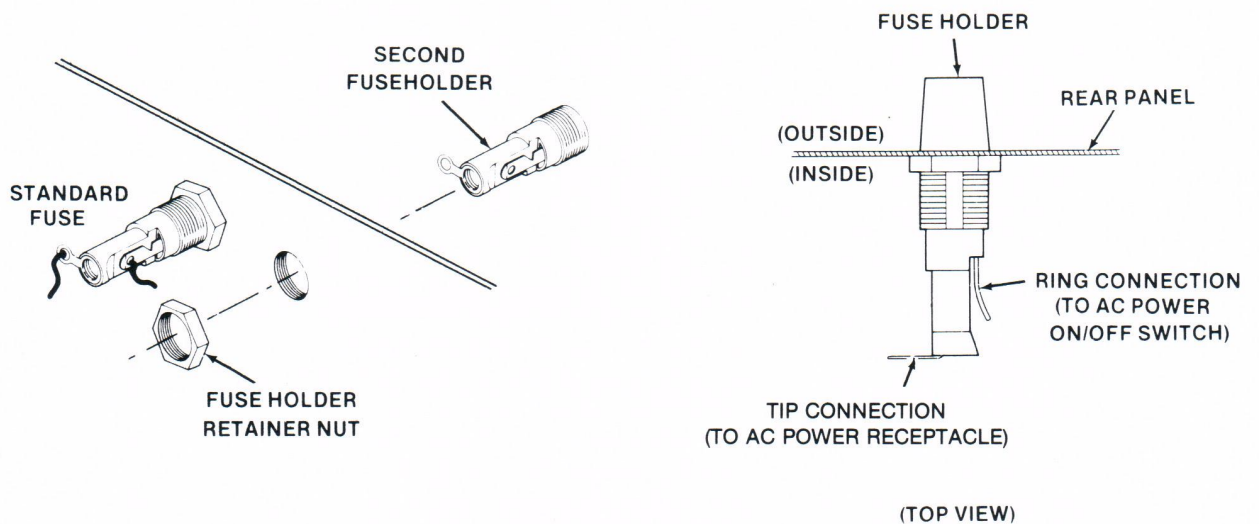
SECOND FUSEHOLDER ASSEMBLY INSTALLATION
